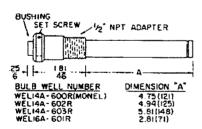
Bulb well for liquid immersion applications where a temperature bulb may be removed without draining tank.
